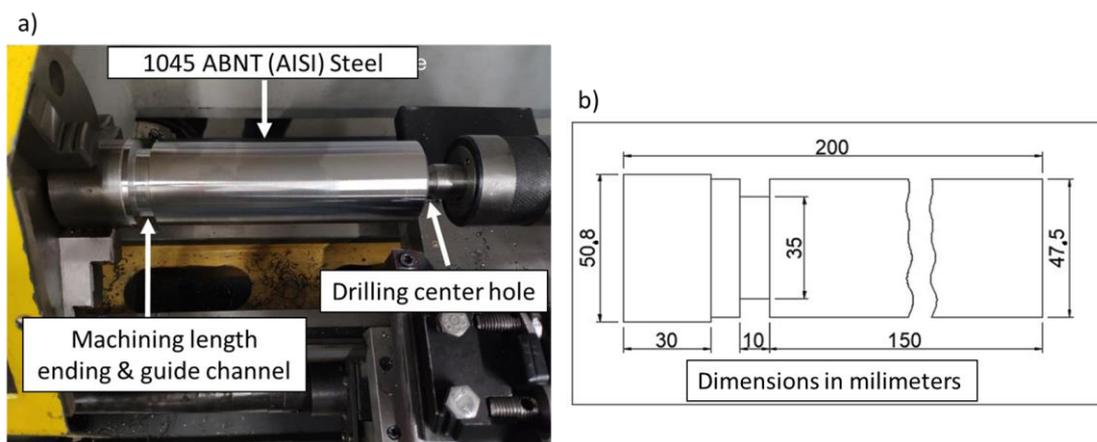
ABNT 1045 Steel: (a) Lathe mounted specimen and (b) specimen dimensions
